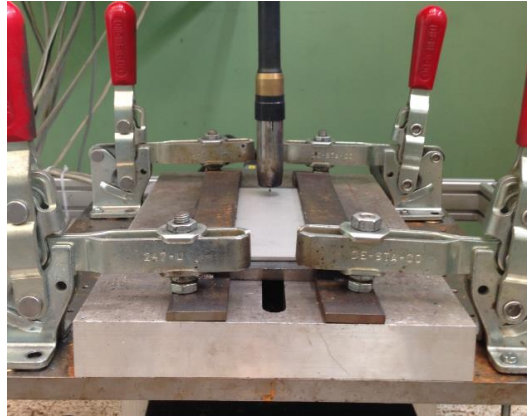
The configuration of bead-on-plate welding.
